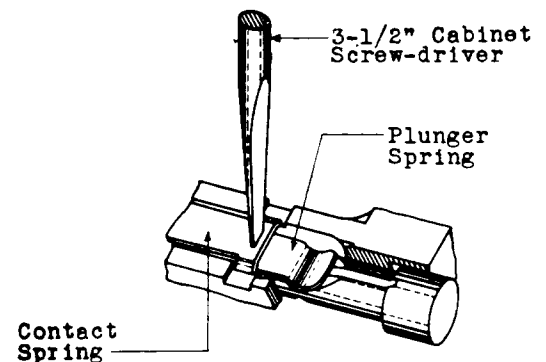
Method of Adjusting for Contact Separation on 69, 492, 508, 521 and 539 Type Keys
